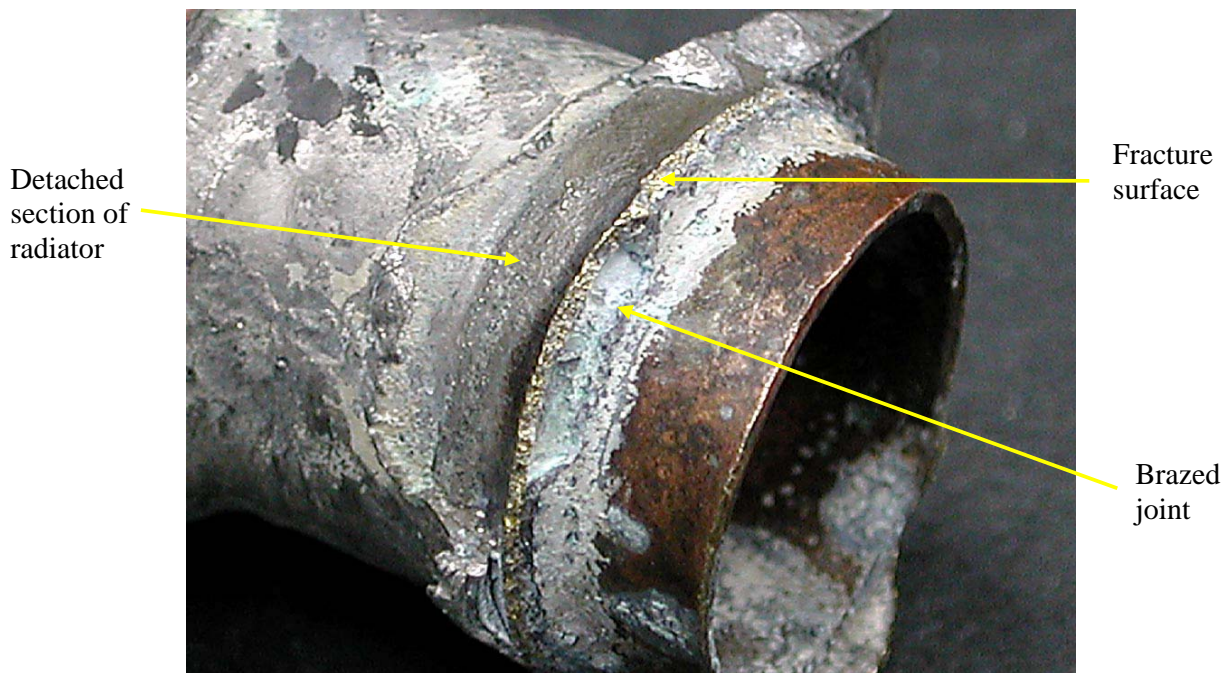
Detailed view of fracture on coupling (photo courtesy of QinetiQ)
